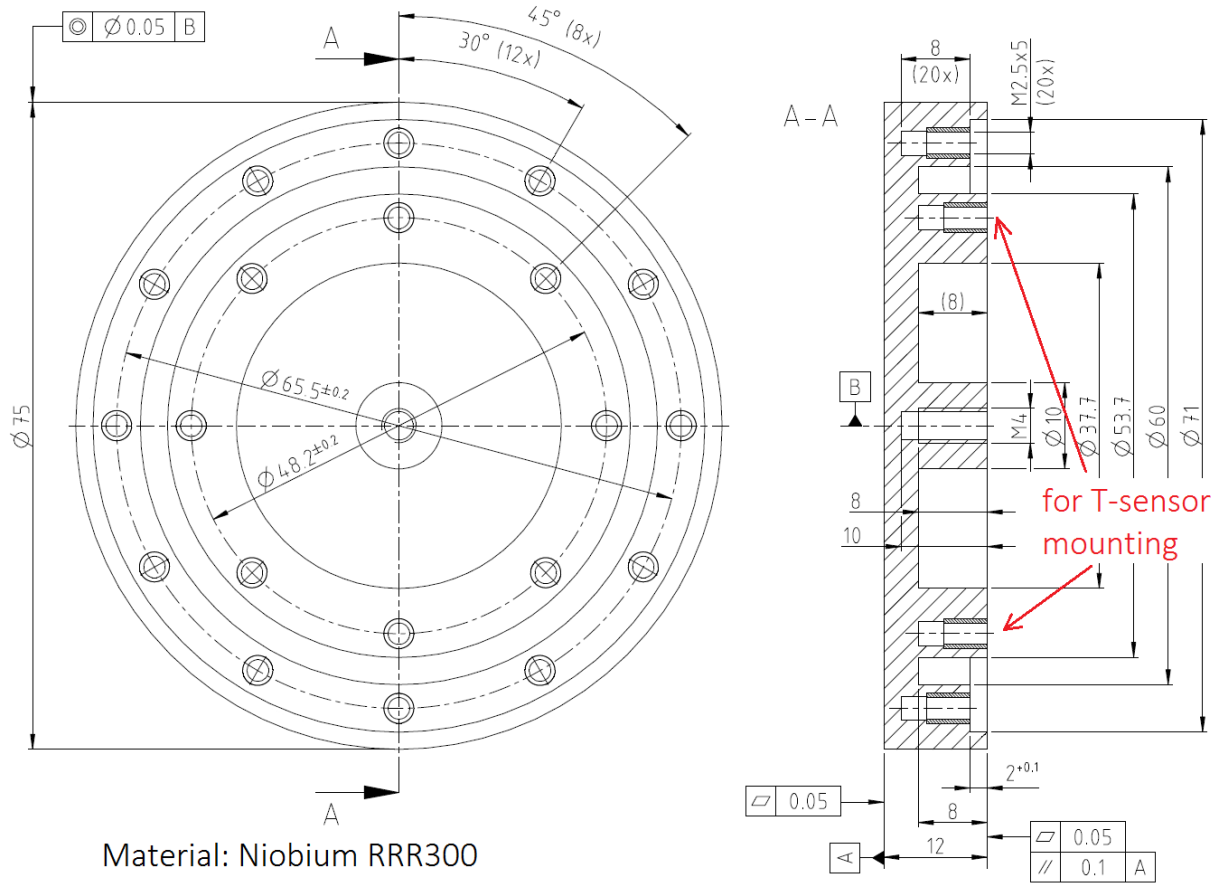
Technical drawing of the sample holder: bottom view and cross section.
